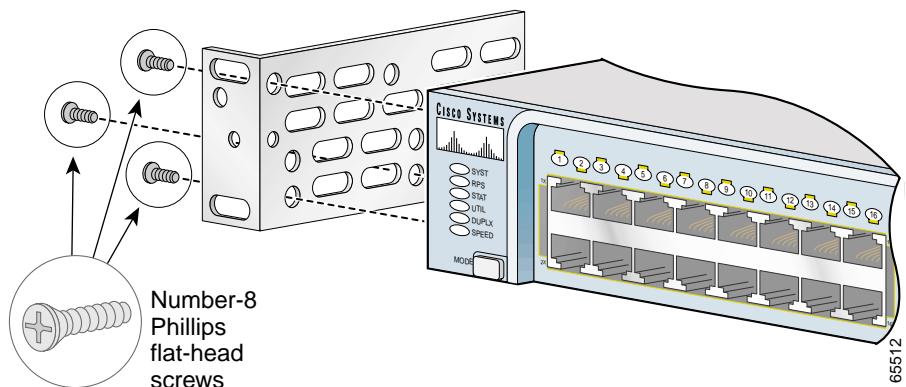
Attaching Brackets on the Catalyst 2950G-48-EI Switch in a 19-Inch Rack (Rear Panel Forward)
